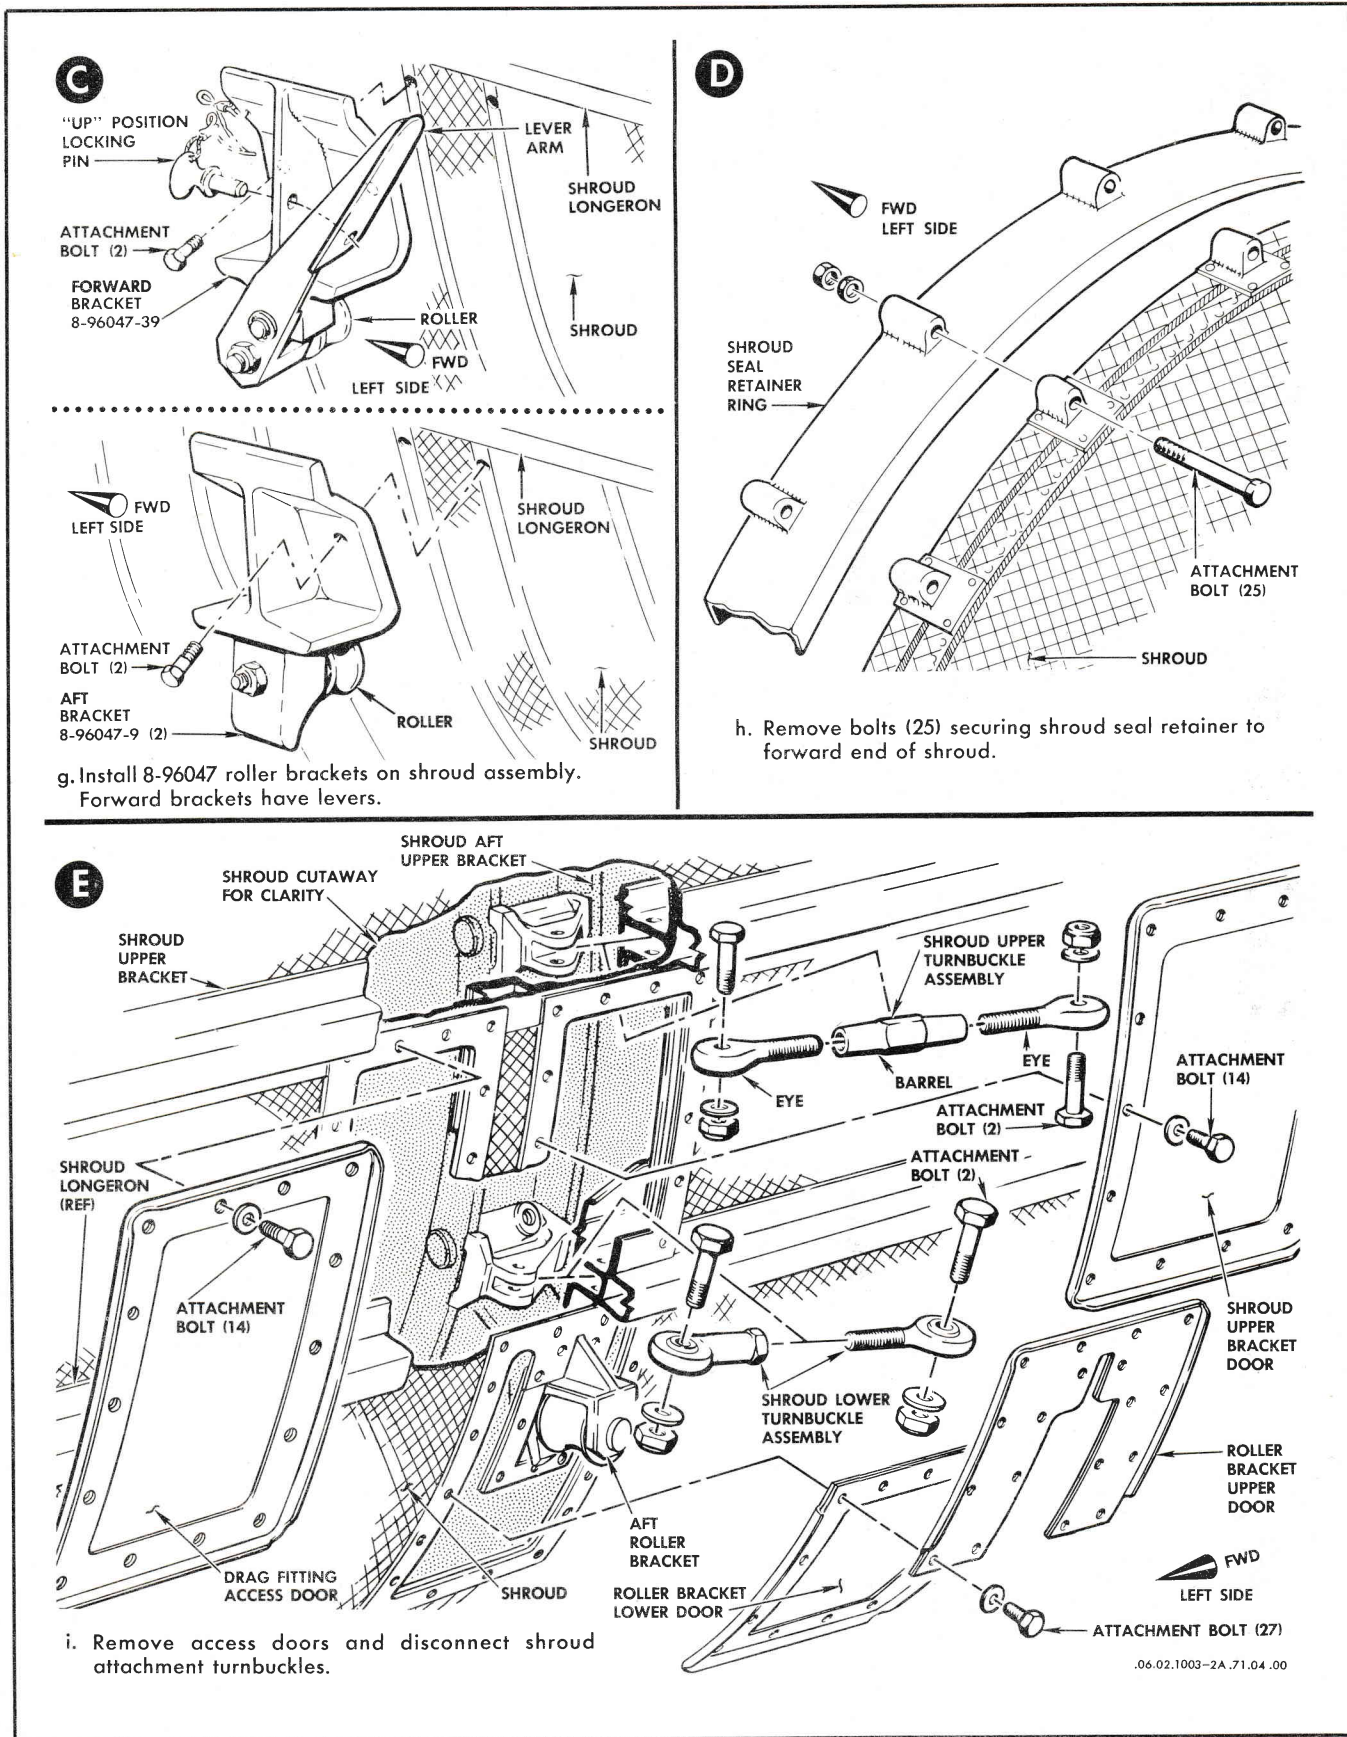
Replacement, Engine Shroud Using Stand USAF ETU-8/E (Sheet 3 of 4)
